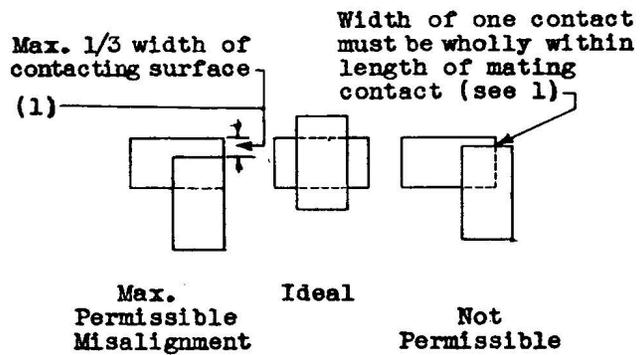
Fig. J - Alignment of Heavy Contacts - Plan View of Contacting Surfaces
